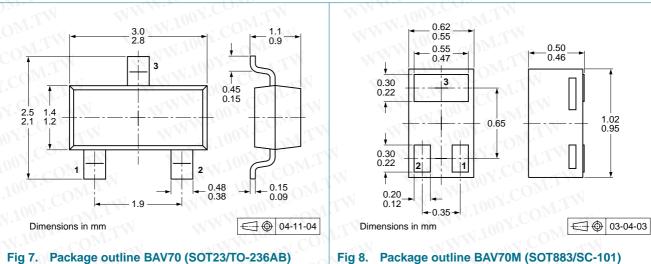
Package outline BAV70 (SOT23/TO-236AB)
